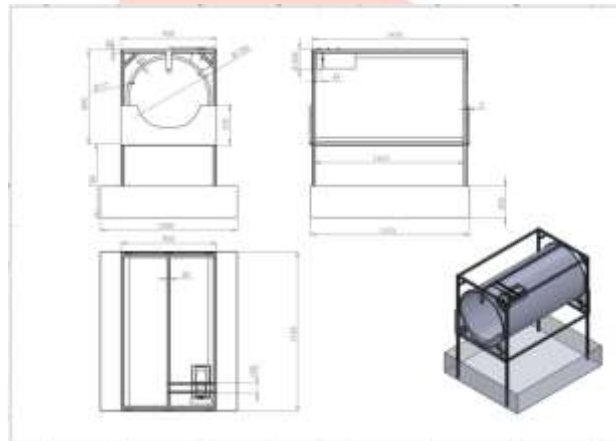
Detailing Drawing Of Vegetable Cleaner
